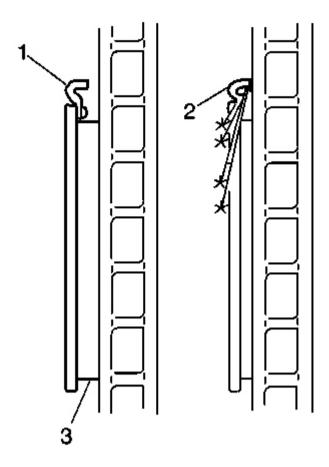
View Of Brake Pads & Audible Wear Sensors Courtesy of GENERAL MOTORS CORP.
